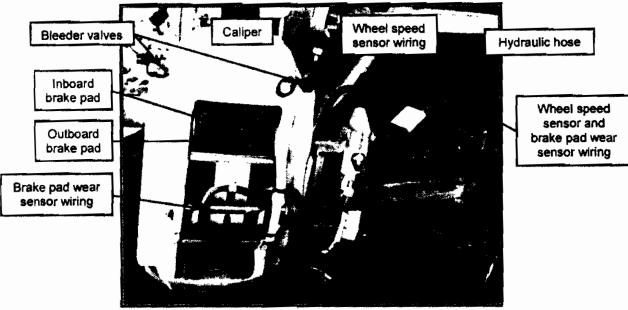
The left front brake assembly of Vehicle #1. (LASD photograph IMG_200.JPG)
